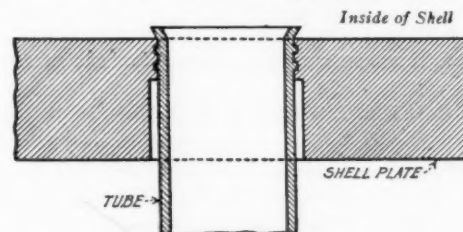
NARROW TUBE SEAT FORMED BY COUNTERBORING OUTER FACE OF DRUM
